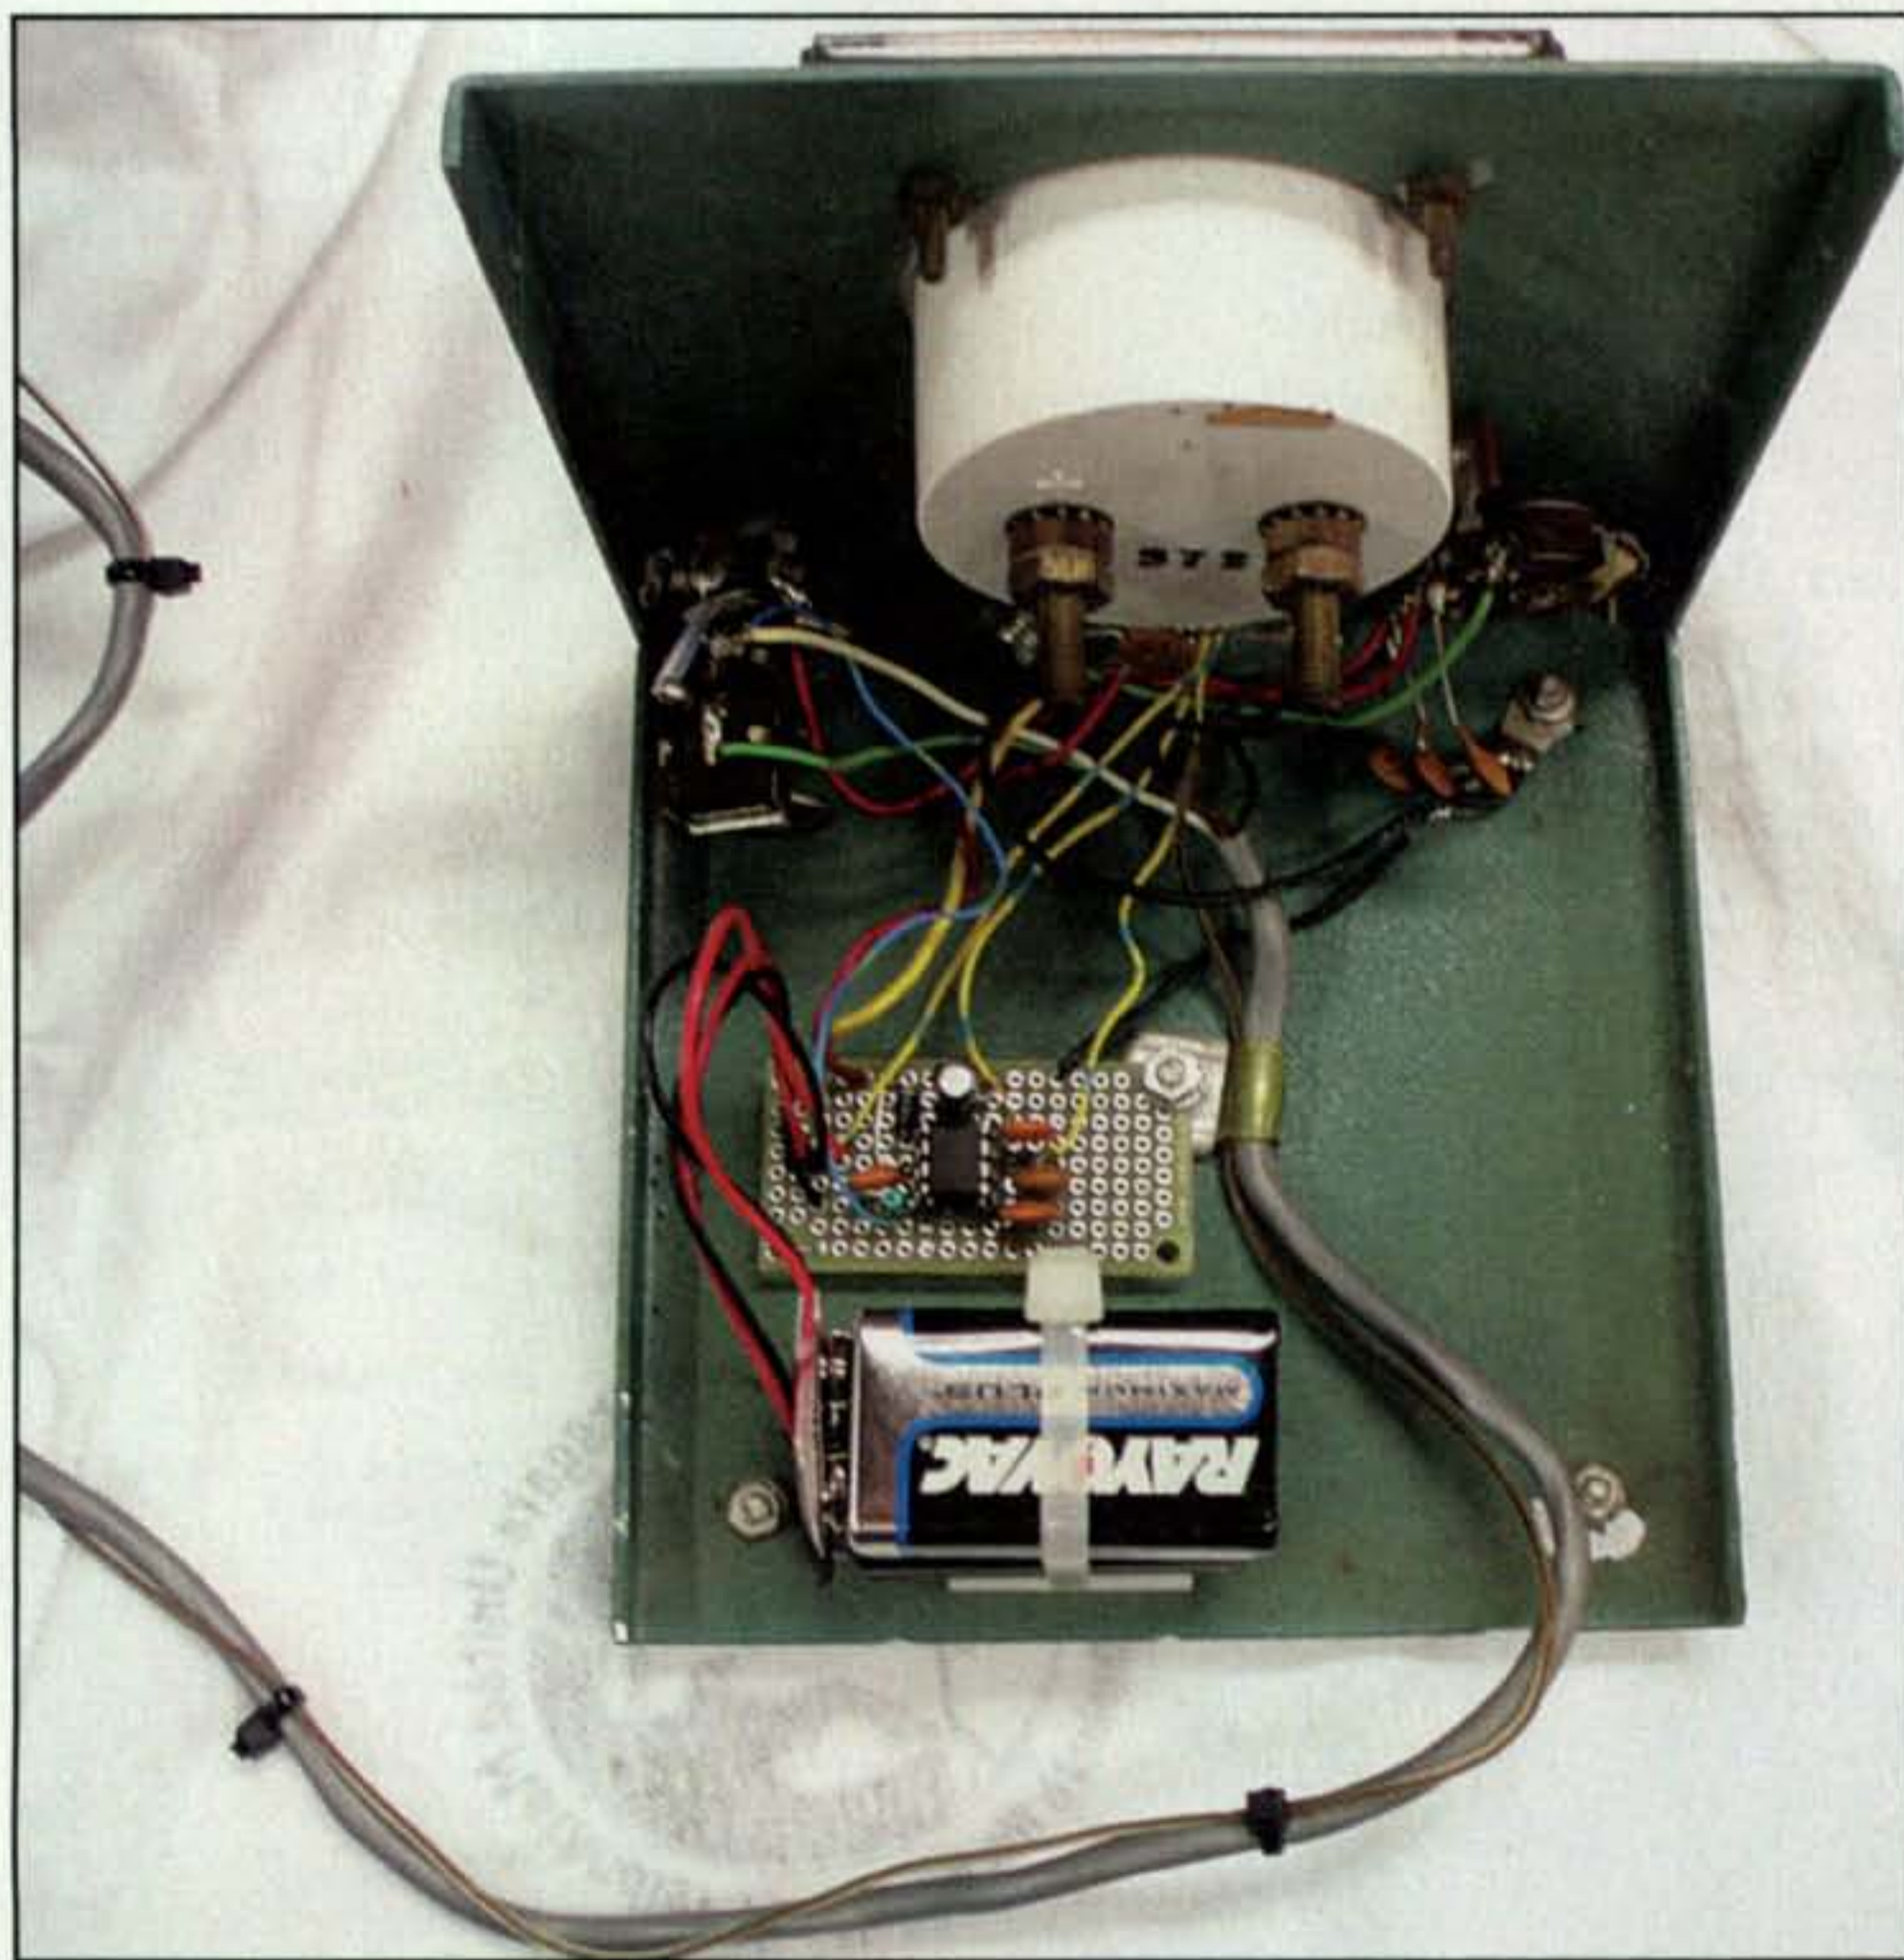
Photo E — New circuit board and batteries mounted in the meter base assembly. Note the added wire from the remote sensor is tie-wrapped to the existing 5-conductor cable. You may also substitute a new 6-conductor cable (but that's a lot more work!).
